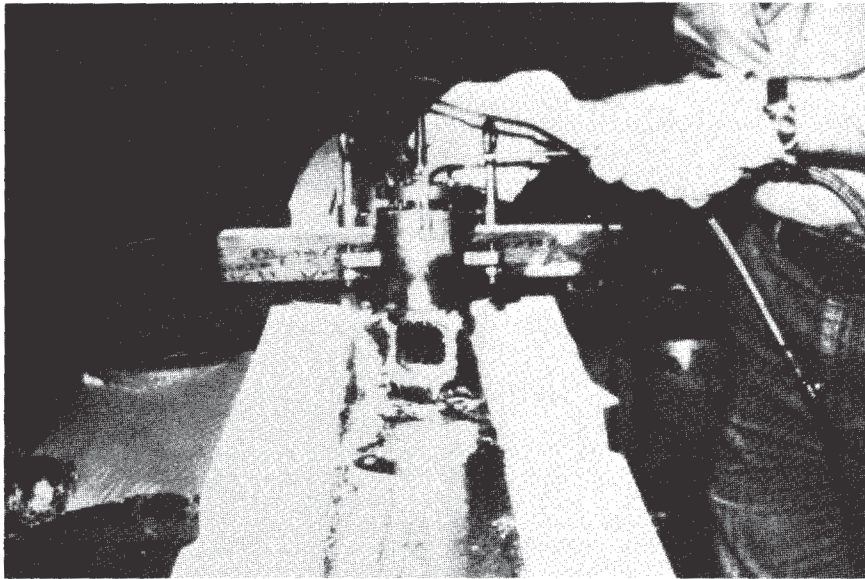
4-M Probe Assembly Being Immersed Into Flowing Stream of Molten Metal
